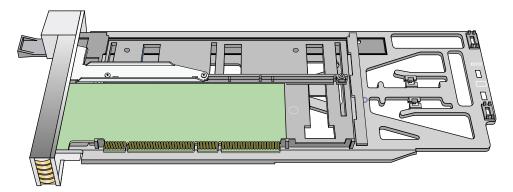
Installing the Bracket to Secure a Half-height PCI Card
